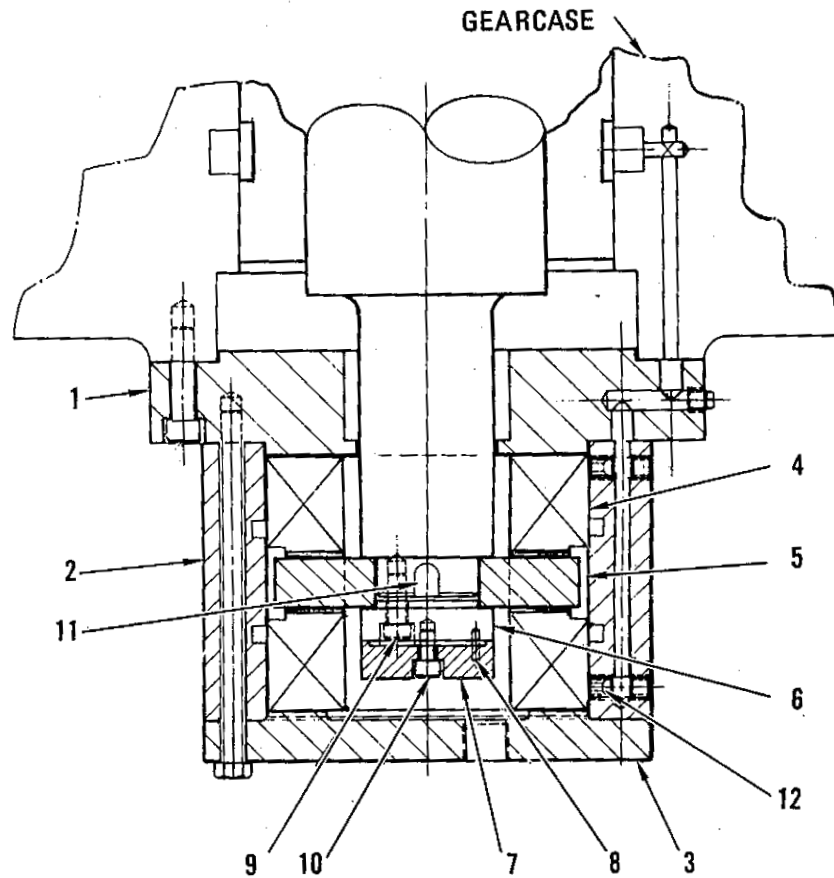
Tilting Pad Self-Equalizing Thrust Bearing.
